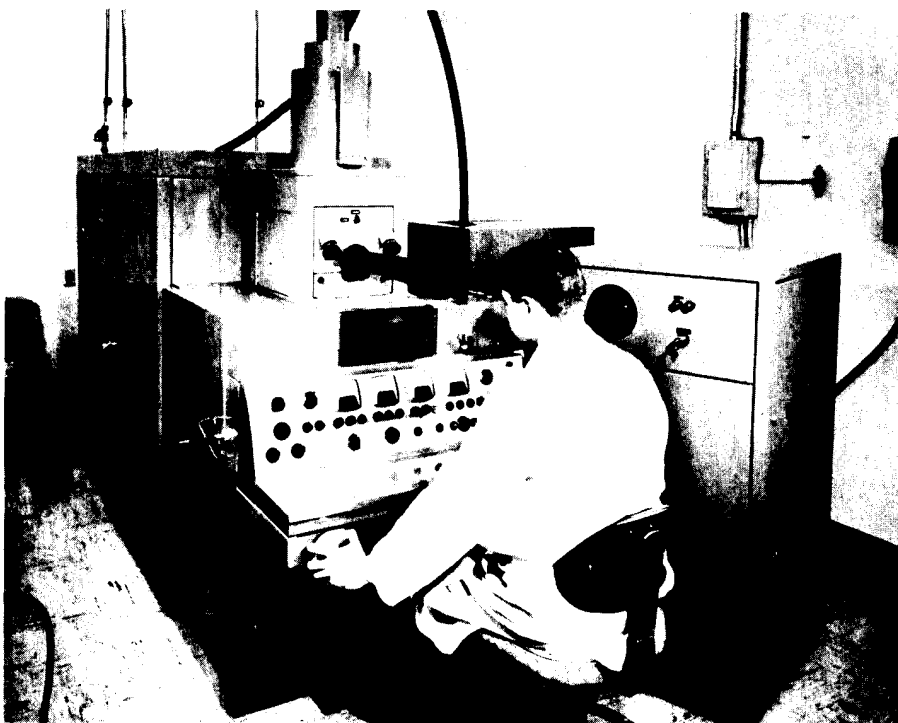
ELECTRON BEAM WELDING EQUIPMENT
